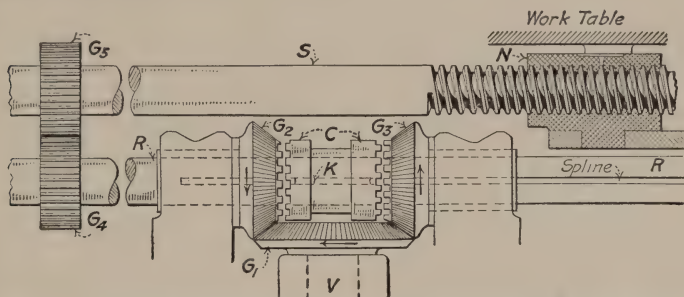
Illustrates principle of bevel-gear reversing mechanism as applied to milling-machine table feed. (Brown & Sharpe.)
